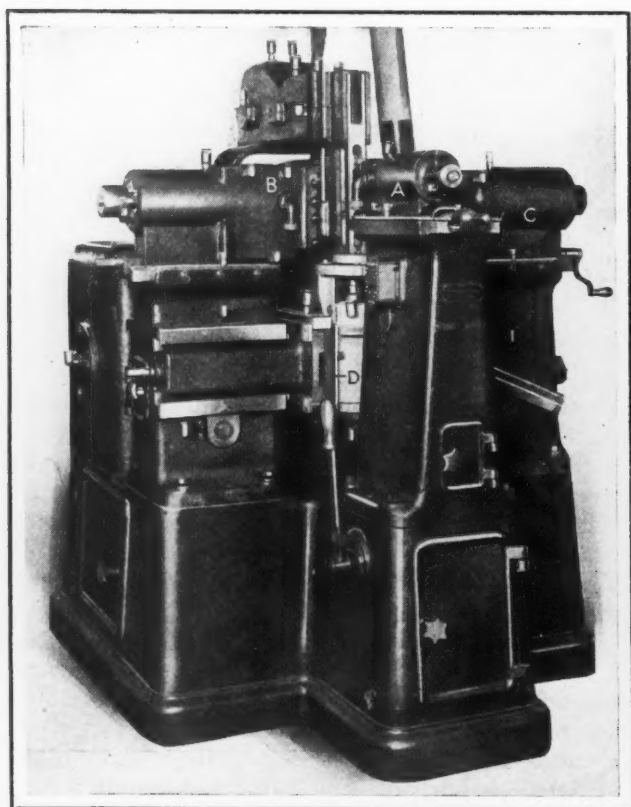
Special Machine Driven by Six Motors to Simplify the Design
